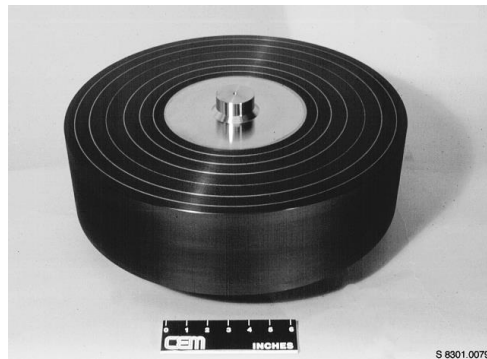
Flywheel rotor composed of 7-layer composite rim and titanium shaft, developed by Center for Electromechanics, University of Texas at Austin, USA, 2015, for onboard storage on a hybrid electric transit bus, with $E = 1.93 \text{ kWh}$, $v_R = 902 \text{ m/s}$, $m = 58.2 \text{ kg}$, $n_{\max} = 40000 \text{ min}^{-1}$, $r_o = 431 \text{ mm}$, $h = 152 \text{ mm}$ [39]
